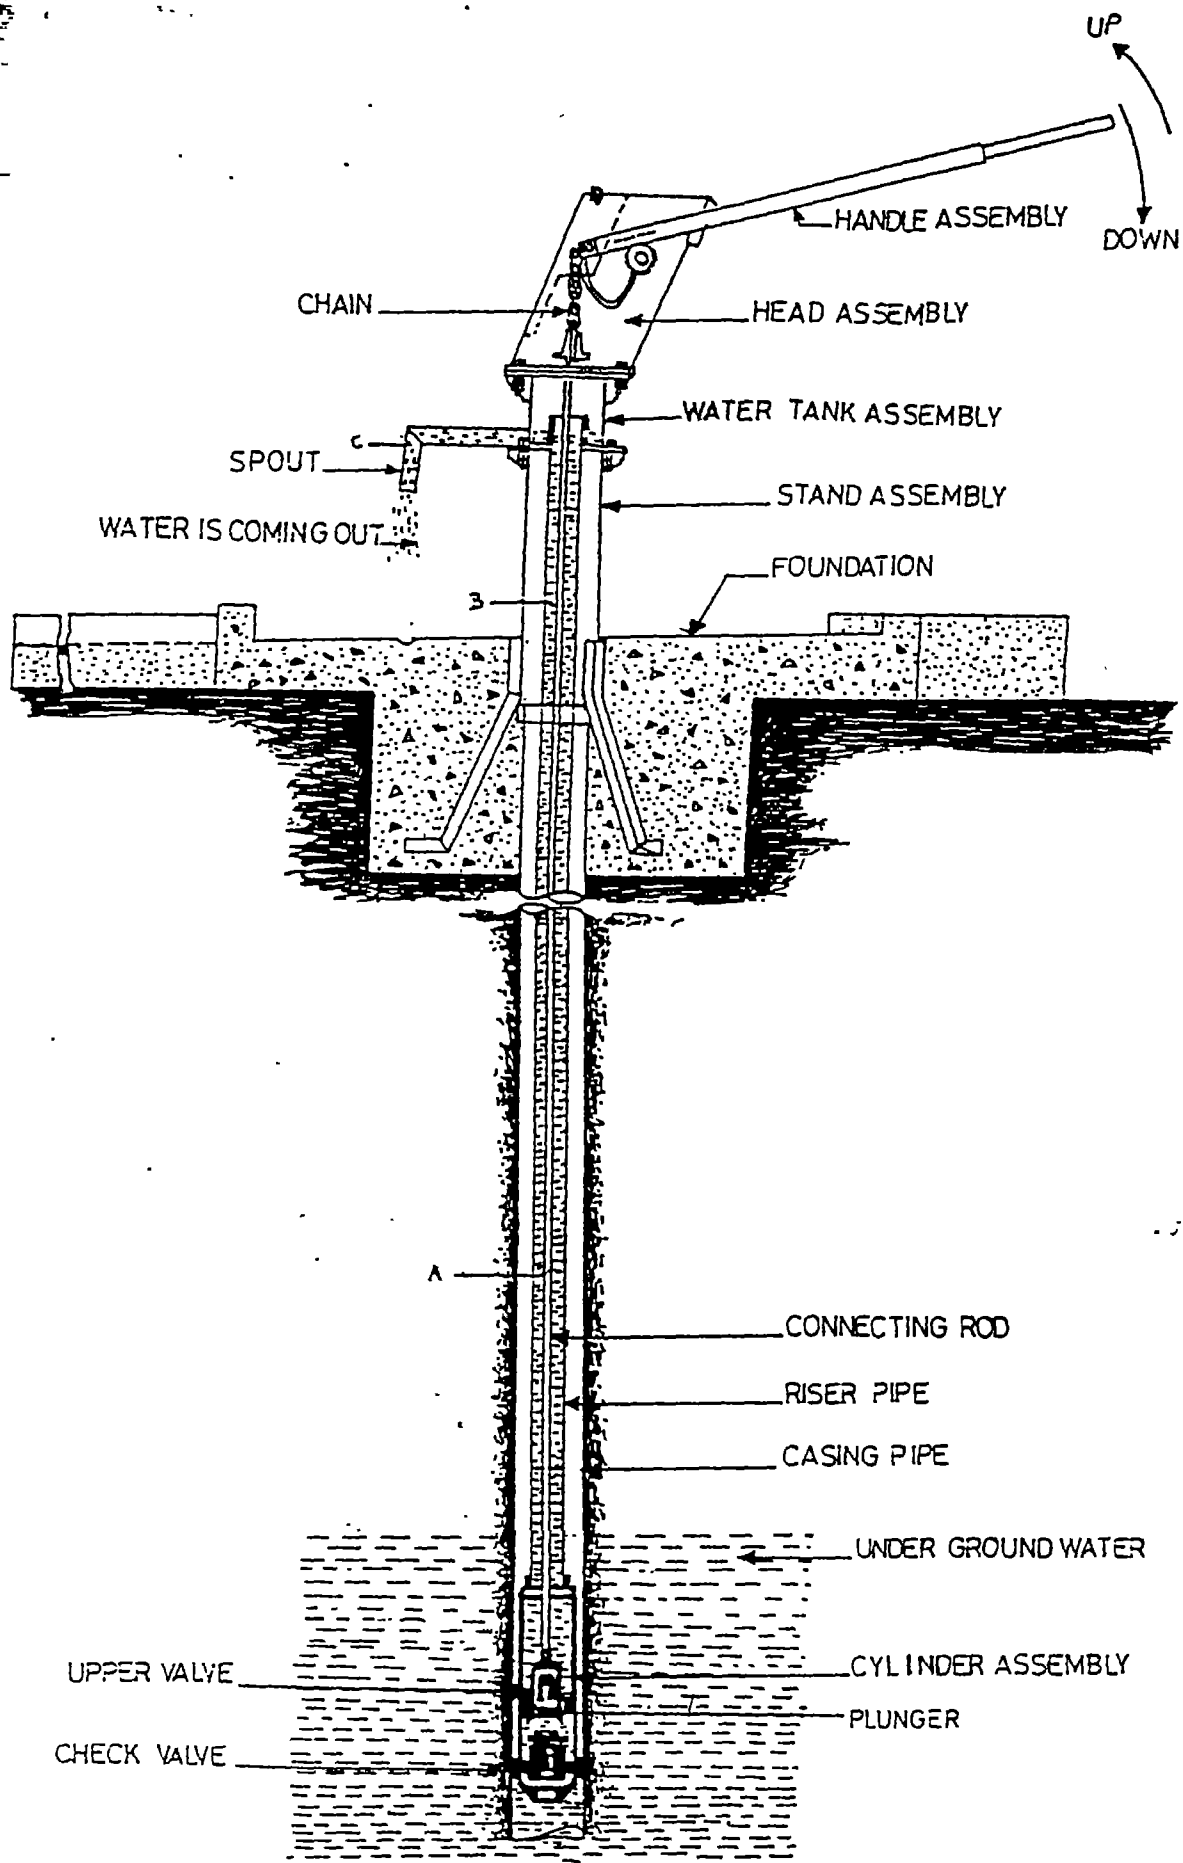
WORKING PRINCIPLE OF HAND PUMP
